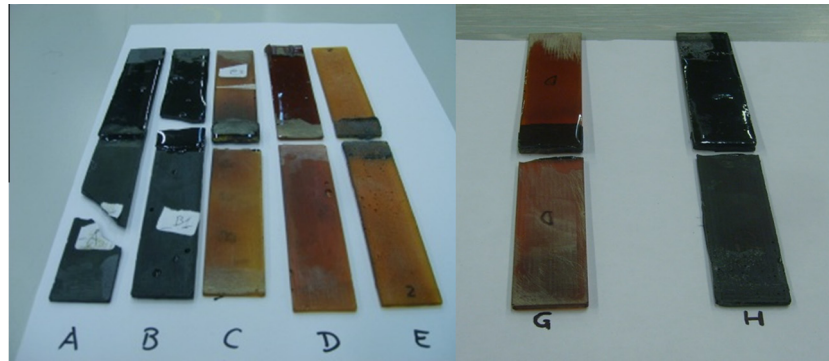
Detail of failure of bonded joints occurred in lap joint shear tests.
